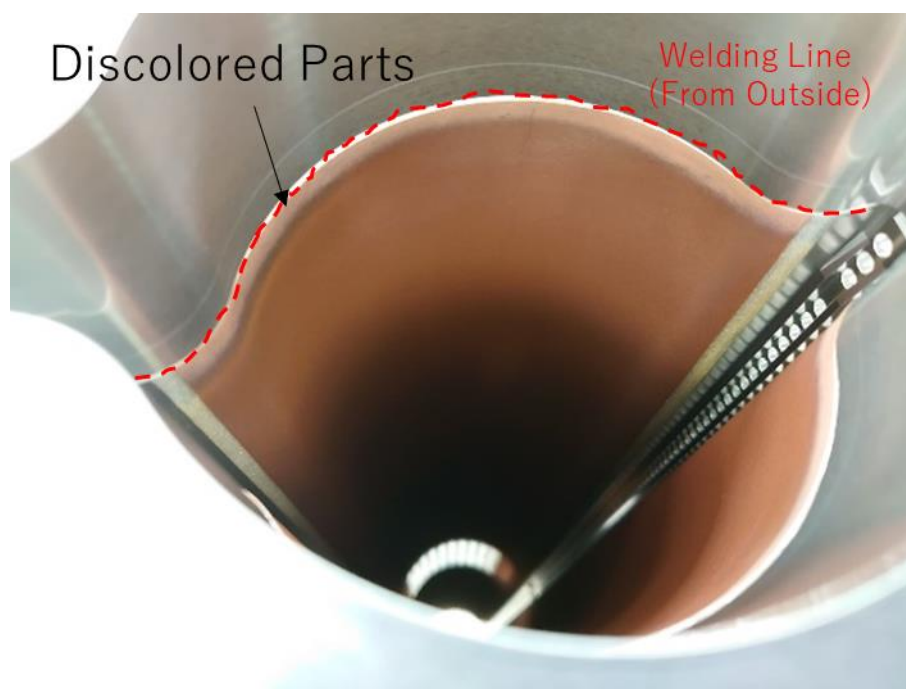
Discoloration of the surrounding coating attributable to high temperatures during welding
